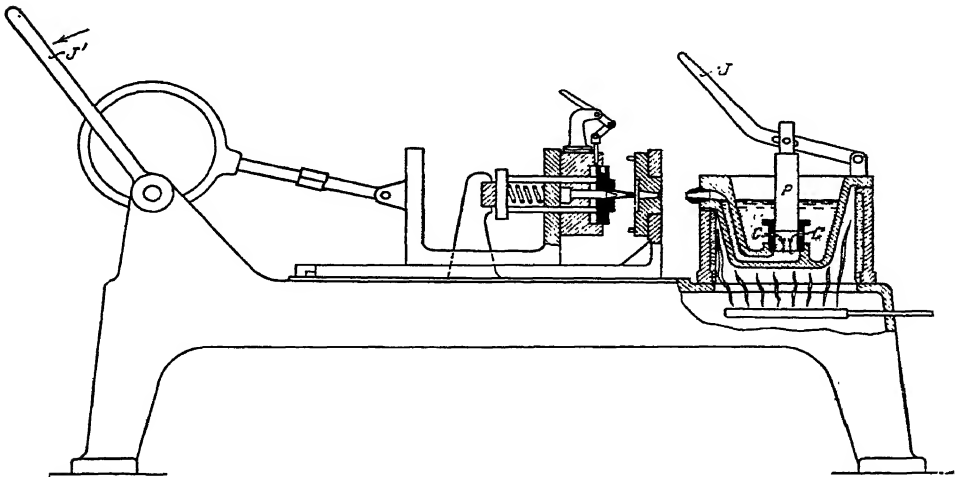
TYPICAL PLUNGER MACHINE READY FOR EJECTION OF CASTING.
